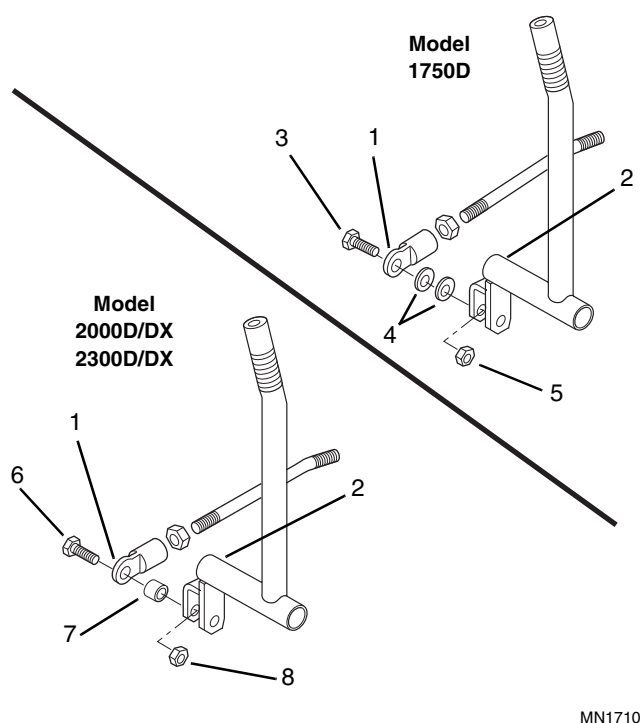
Auxiliary Hydraulic Control Cable Installation
